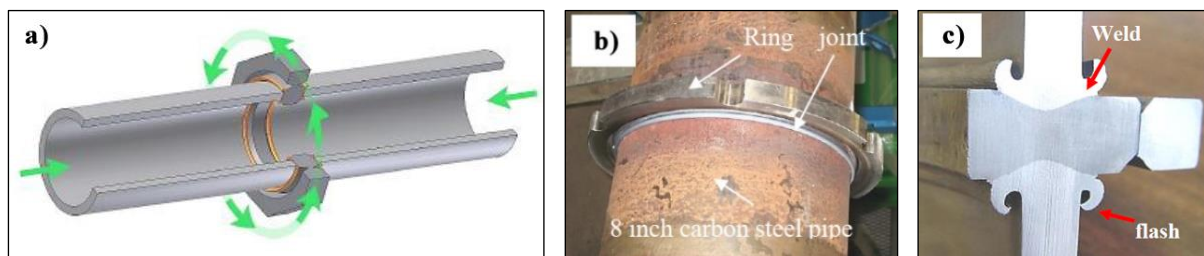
FRIEX process: a) principle; b) pipe welding; c) macrostructure [45]
